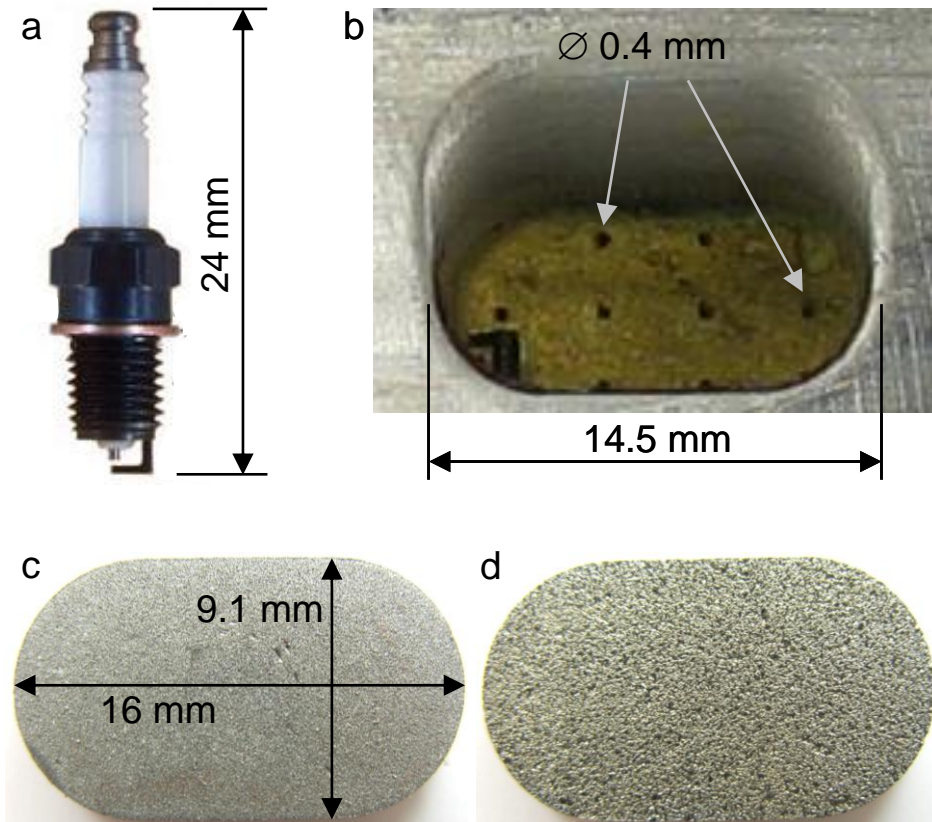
Photos of (a) Rimfire V1 Viper spark plug, and (b) Combustion chamber equipped with 0.1 mm thick brass shim insert with 7 laser cut holes. Two 6.35 mm thick 316SS fluidic valves wire-EDM from porous media grades; 2 (c) and 10 (d).
